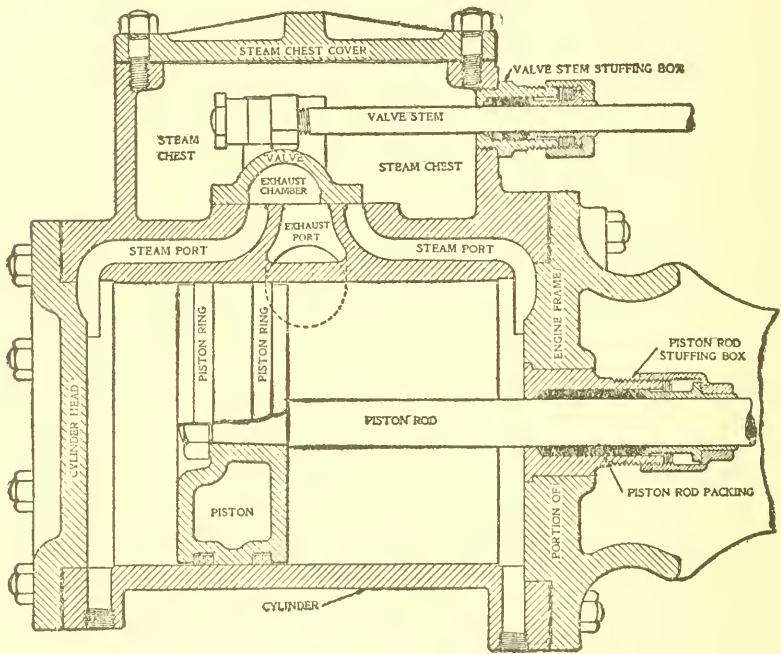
SECTIONAL VIEW OF SIMPLE CYLINDER.
